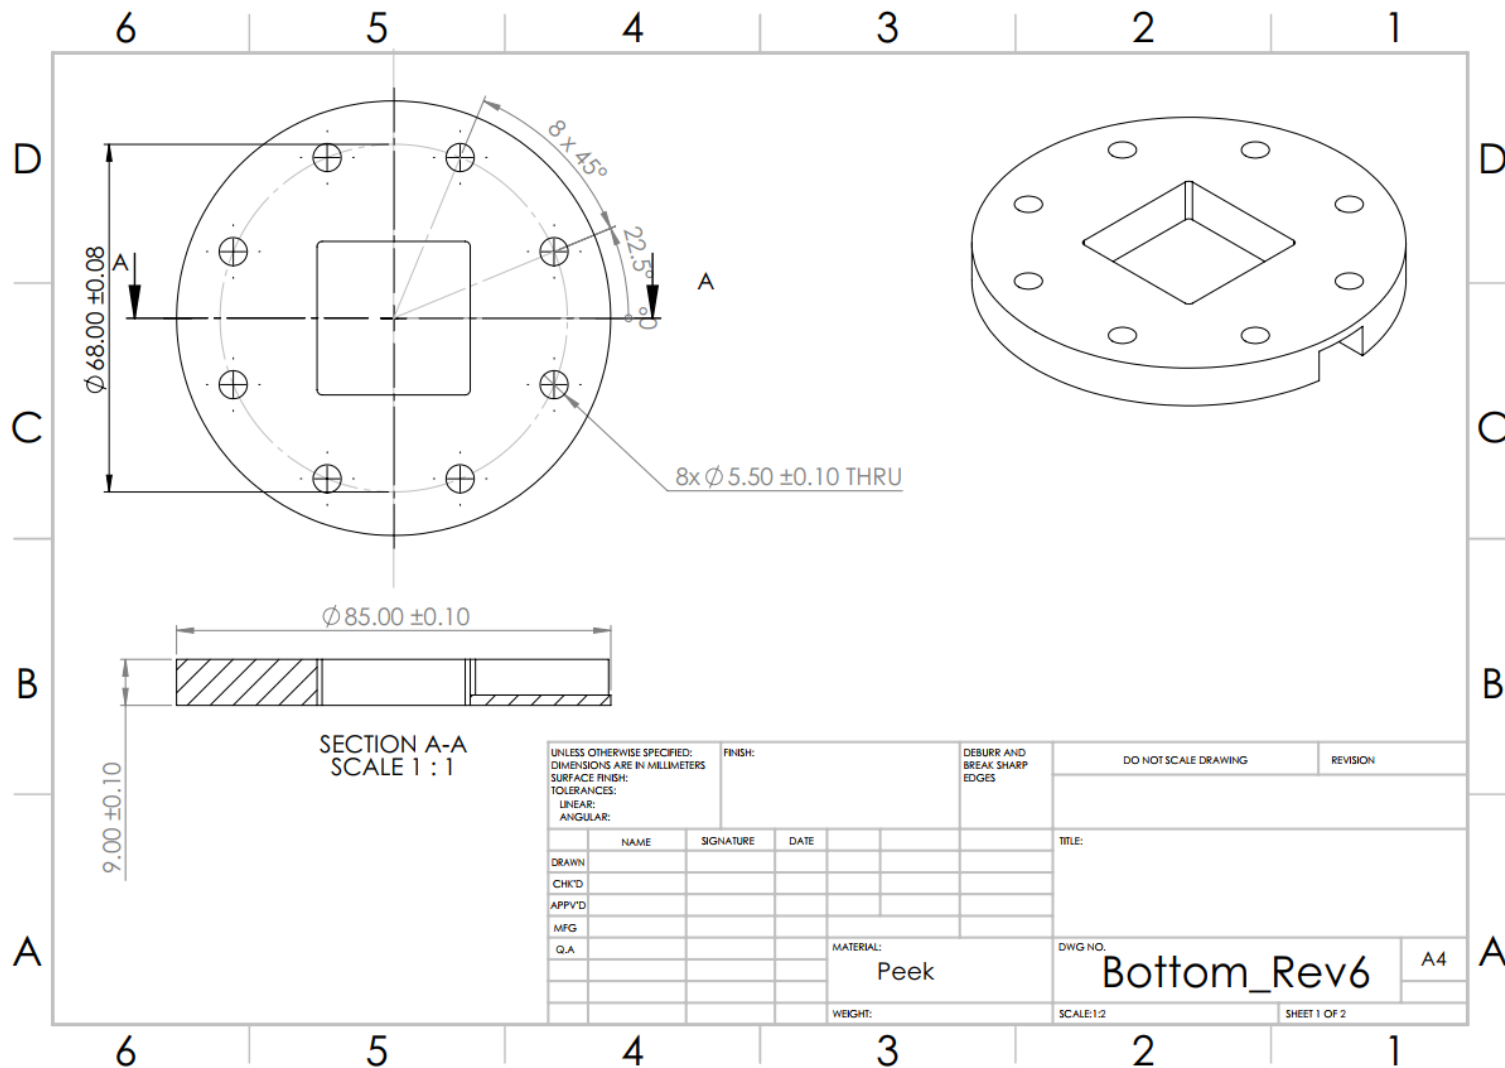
Page 1/2 for the mechanical drawing of bottom carrier plate.
